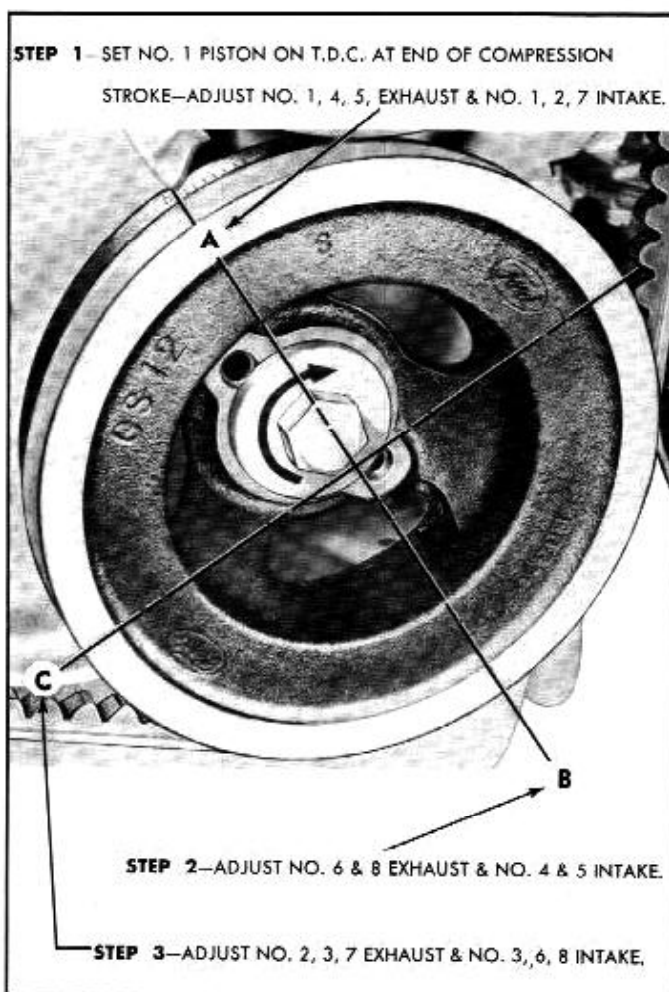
A-11—Quadrant for Preliminary Valve Lash Adjustment
